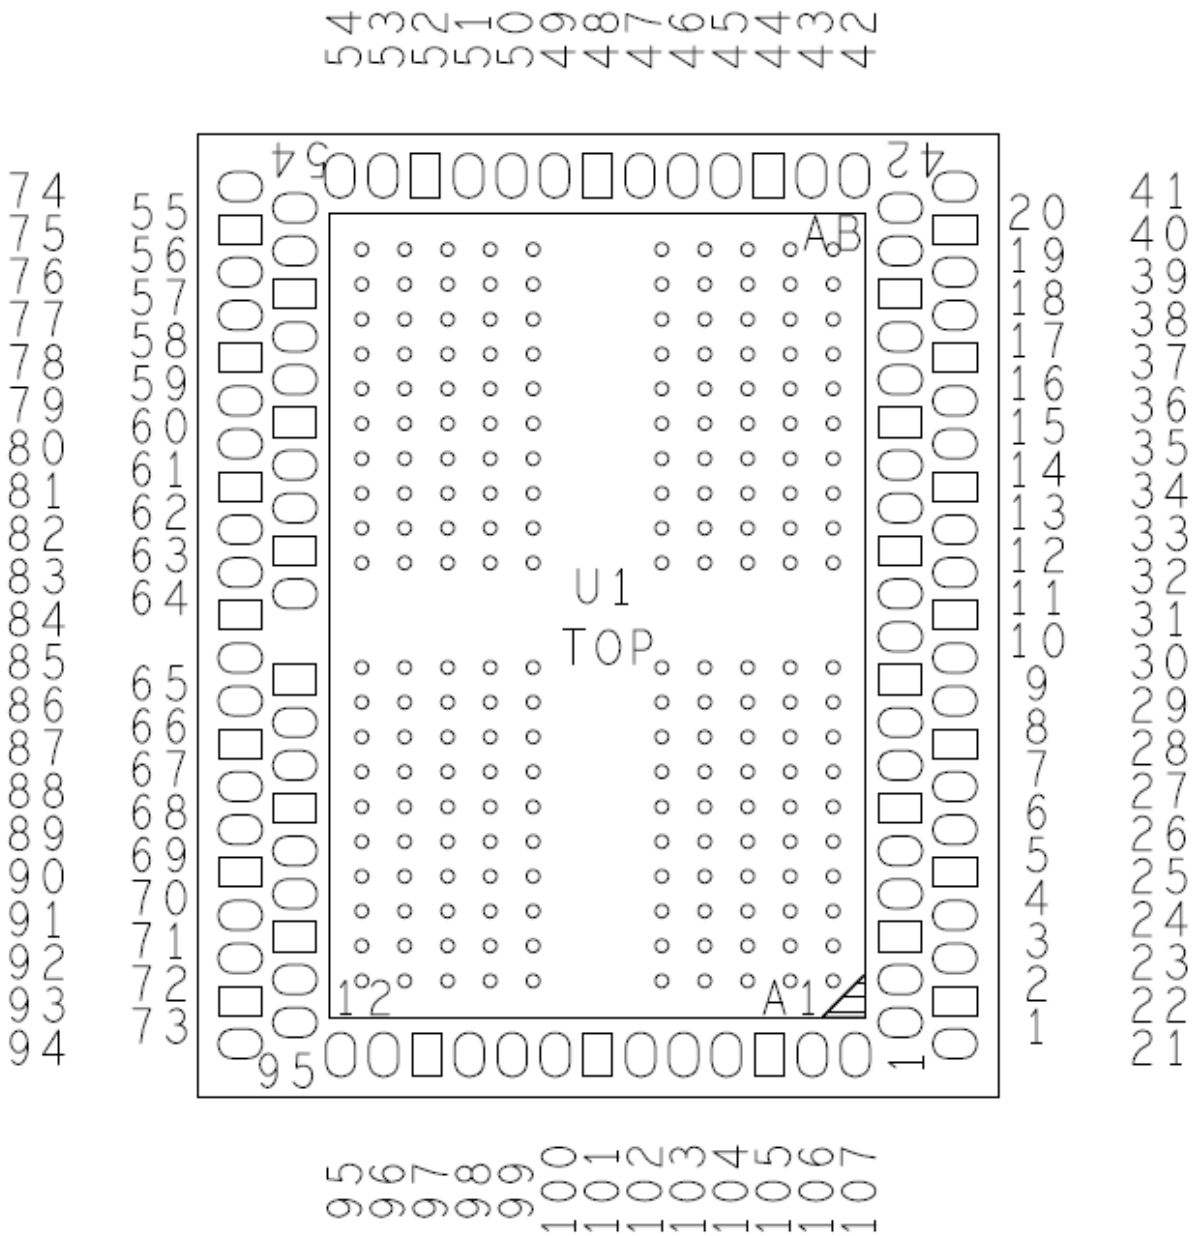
LPDDR4 200 Ball Riser Mechanical Dimensions
